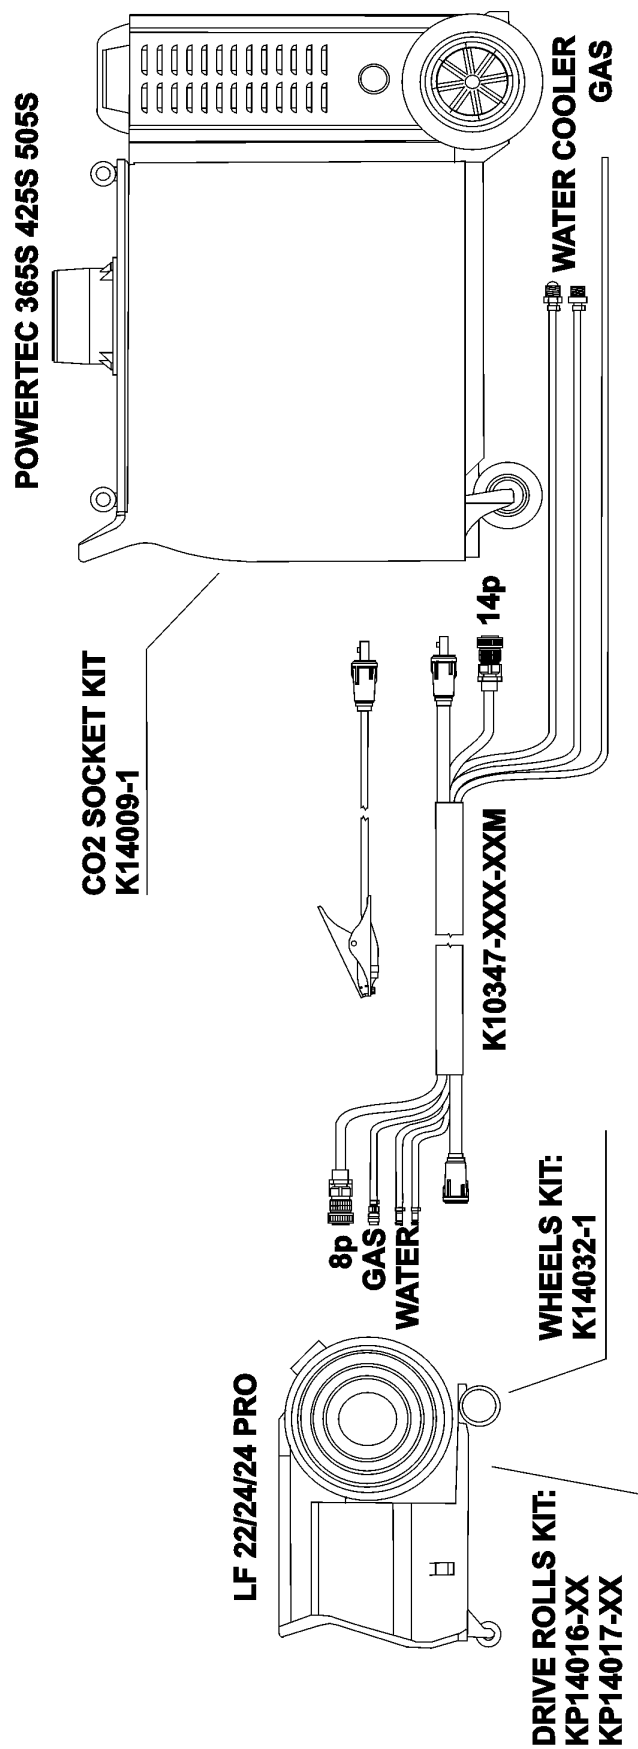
Figure F: Machine Assembly 3 - 365S / 425S / 505S
